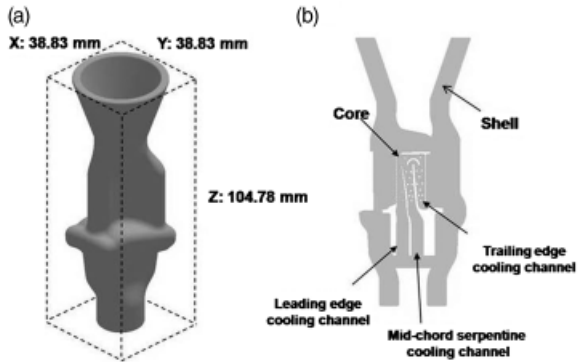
Overall dimensions of integrally cored ceramic mold (ICCM) fabricated by ceramic stereolithography; (a) the size of ICCM and (b) the cross-section of ICCM showing core, shell parts, and three cooling channels; leading edge cooling channel, midchord serpentine cooling channel, and trailing edge cooling channel.
